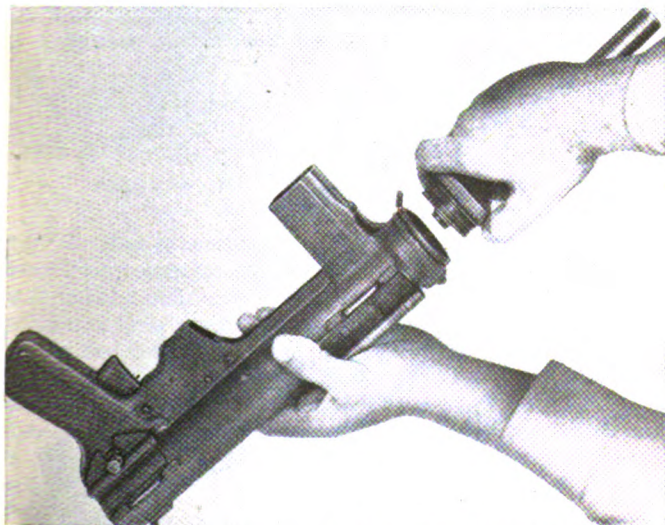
Remove barrel by lifting ratchet and unscrewing barrel collar counterclockwise from the front.
